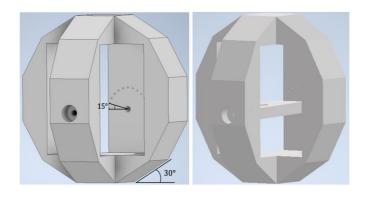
Custom testing rig – Two dodecagons orientated perpendicular (left). Assembly of testing rig with inner beam fastened and able to pivot to the marked 15° points on the inner dodecagon surface (right)
